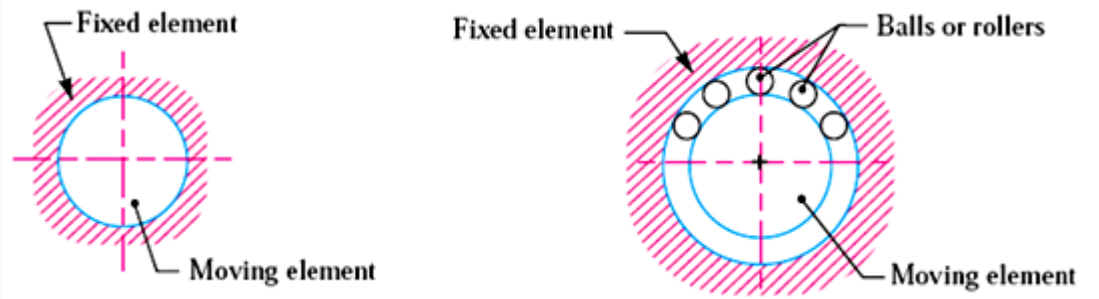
a. Sliding Contact Bearing b. Rolling Contact Bearing
